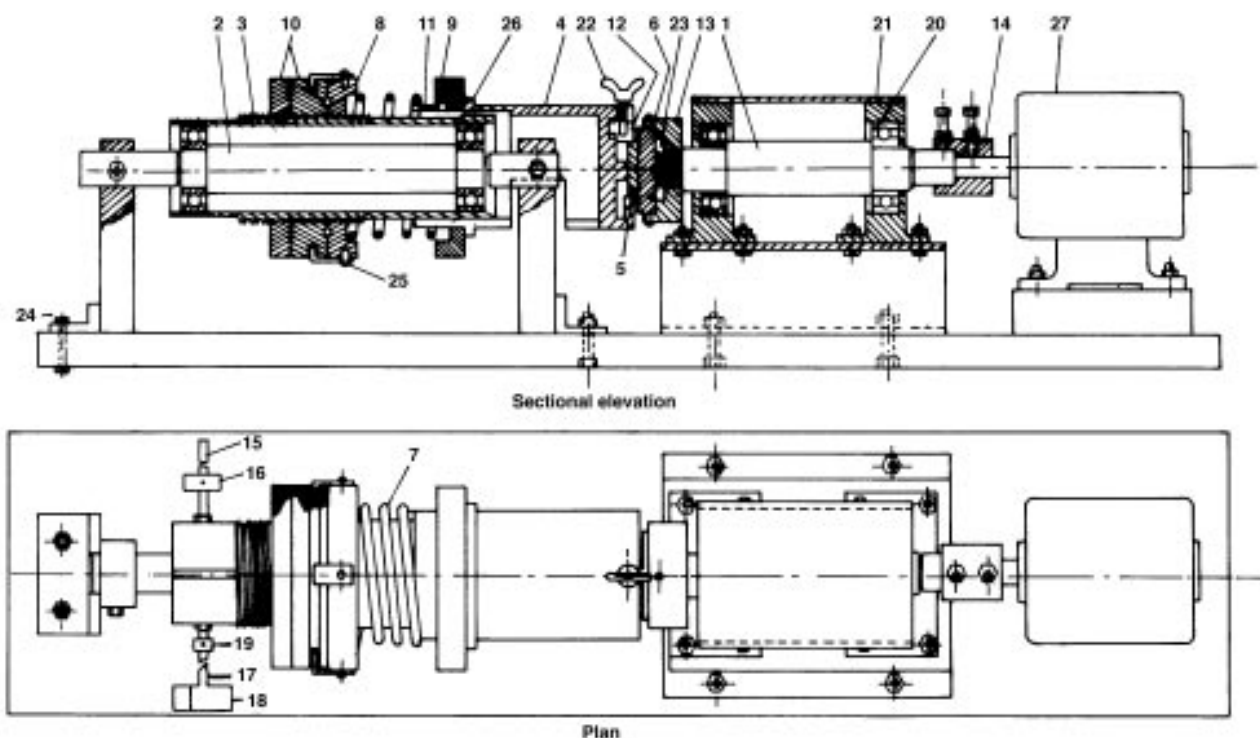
Schematic diagram of design used for measuring device: 1 & 2, shafts; 3, inner cylinder; 4, outer cylinder; 5, test specimen; 6, rotating disc; 7, compression spring; 8, sliding cap; 9, cap; 10, nut and lock nut; 11, key; 12, jaw; 13, standard specimen; 14, sleeve coupling; 15, lever; 16, dead weight; 17, leaf spring; 18, stop; 19, balancing weight; 20, bearing; 21, bearing sleeve; 22, wing nut; 23, check nut; 24, nut and bolt; 25, screws; 26, collar; 27, motor.
